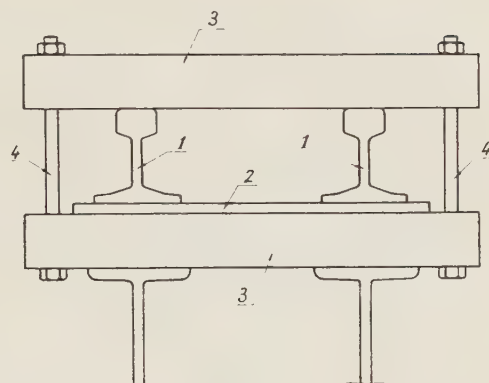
Preparatory set up for welding an acute crossing.
